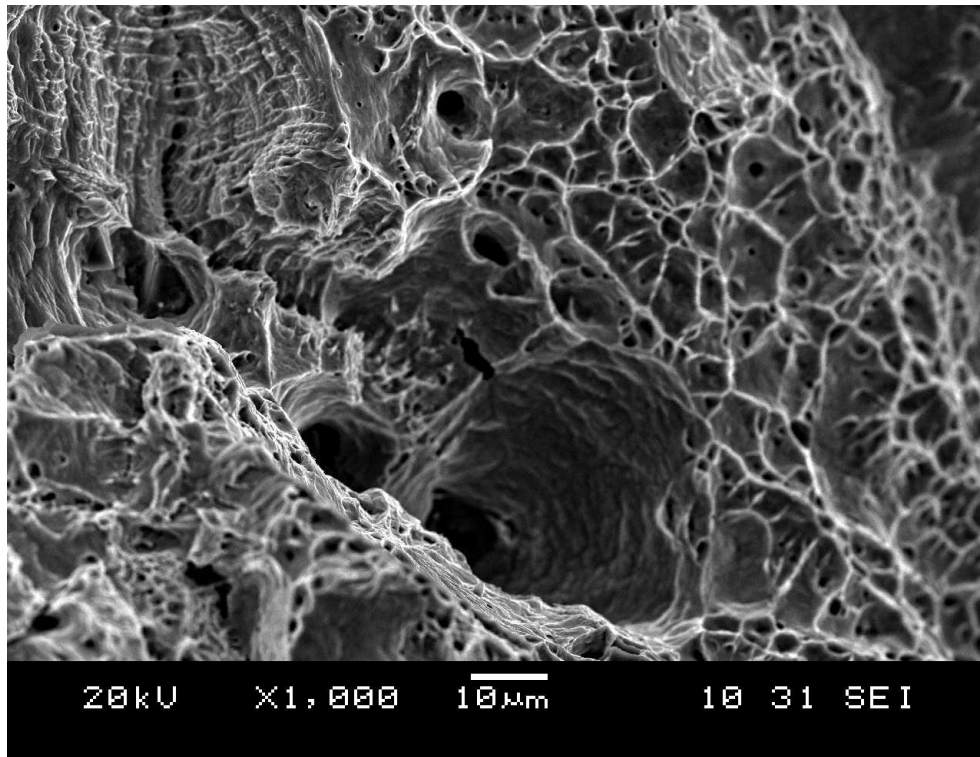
Fatigue fracture surface of IN600 in air
